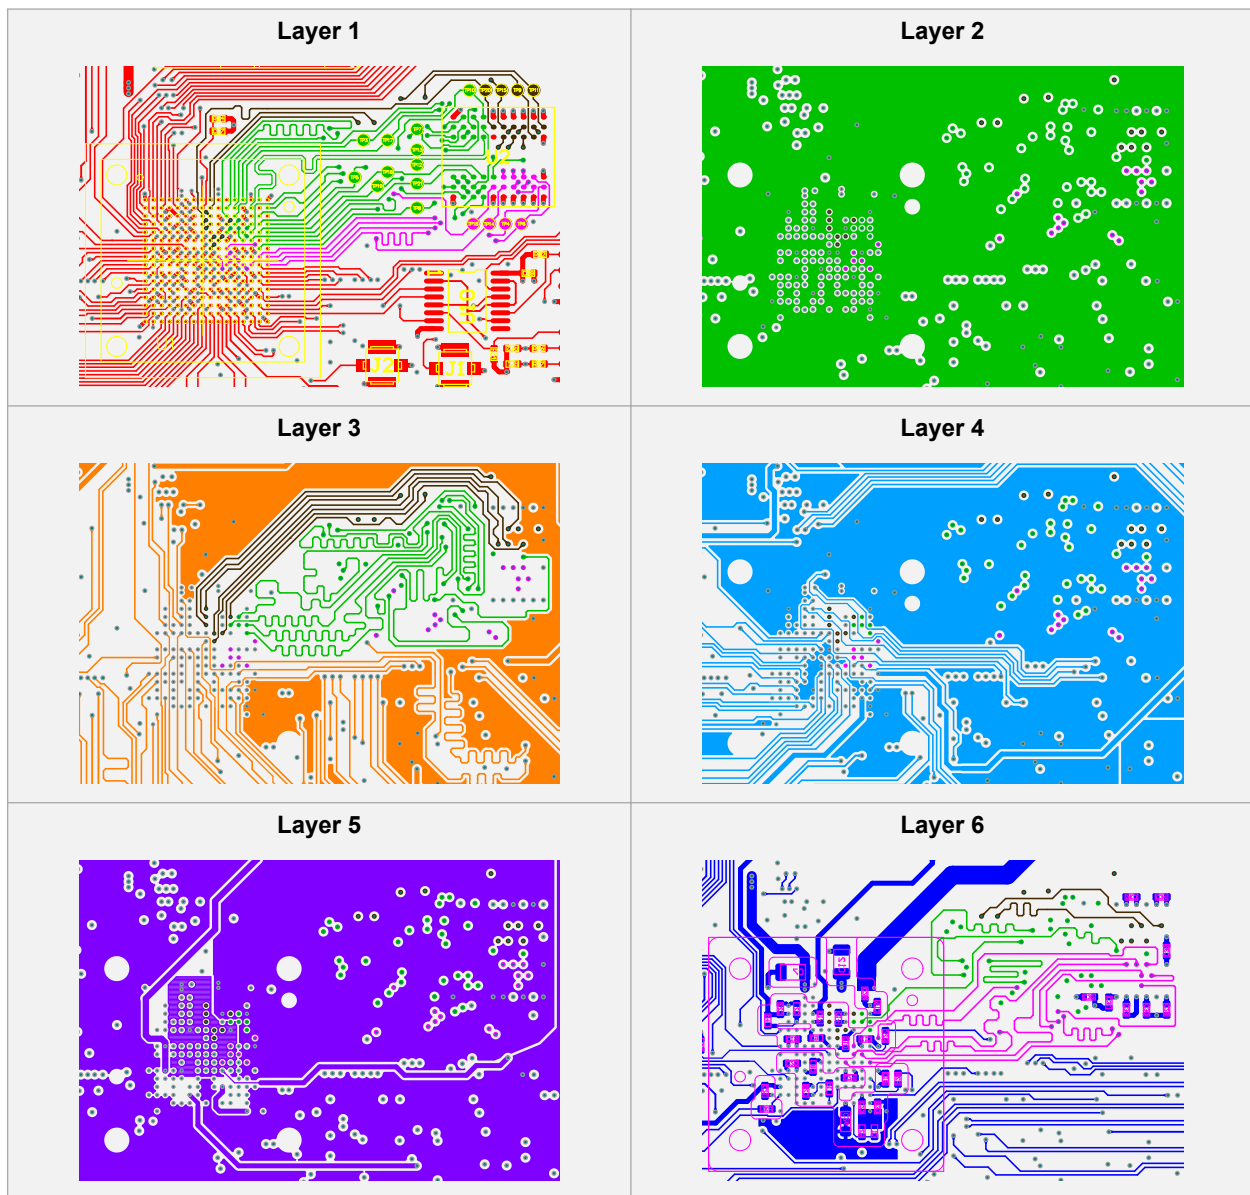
LP-DDR Implementation on 6-Layer PCB Layout
